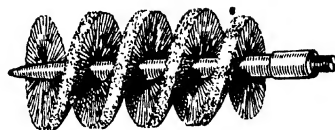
SPIRAL WIRE BRUSH FOR BOILER SMOKE TUBES
